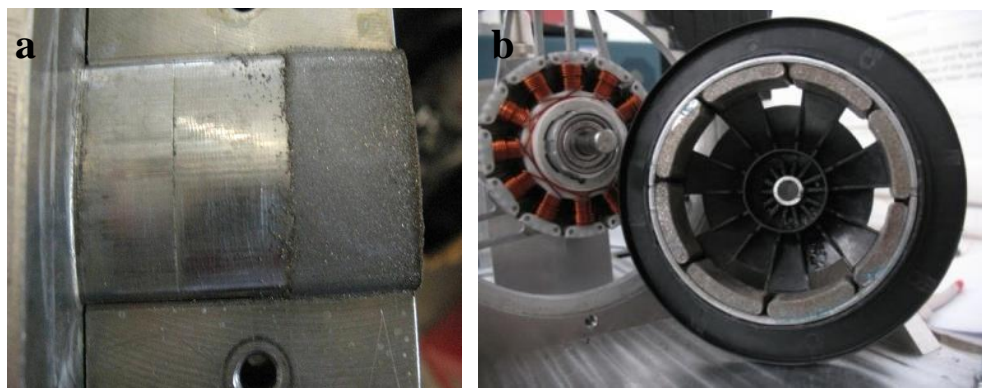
Molding of bonded magnets for reference radial flux machine: sample compaction (a) and rotor with bonded magnets (b)
